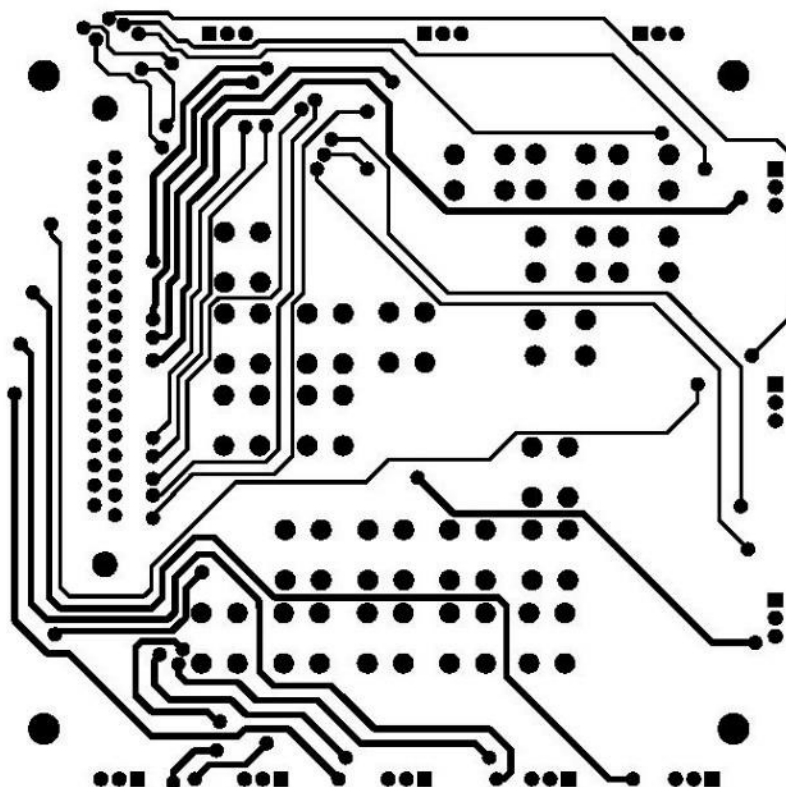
Miniature Semiconductor Measurement Board PCB Mask Top
